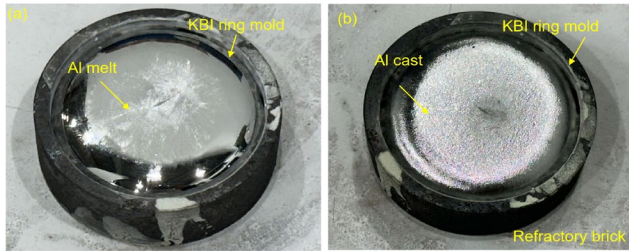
Keller-Bühler-Interlaken standard solidification experiment: (a) aluminum melt poured into KBI ring mold; (b) solidified aluminum casting
